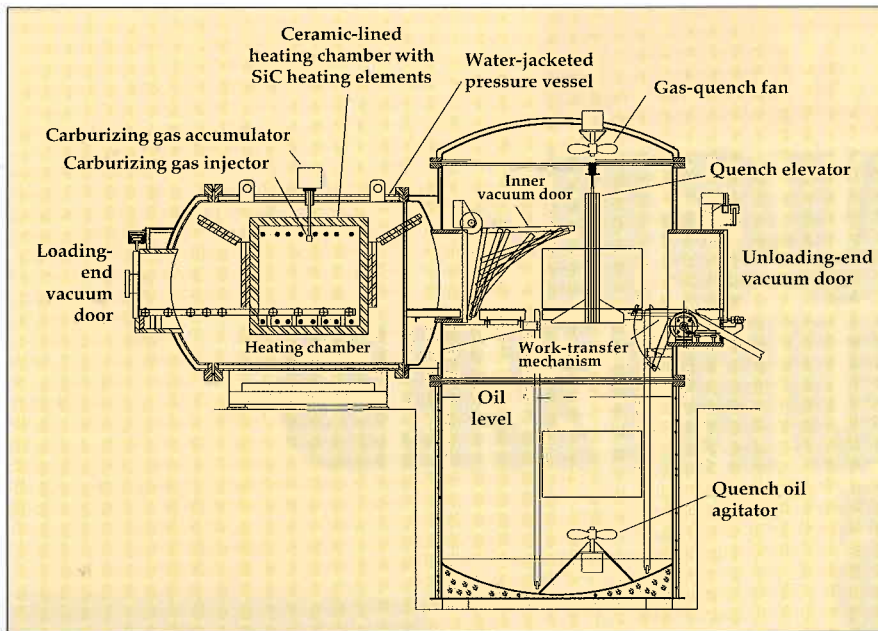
A C.I. Hayes Model VBQ furnace equipped with pulse-pump vacuum carburizing technology. The furnace is used by Hayes Heat Treating to through-carburize tacks.
